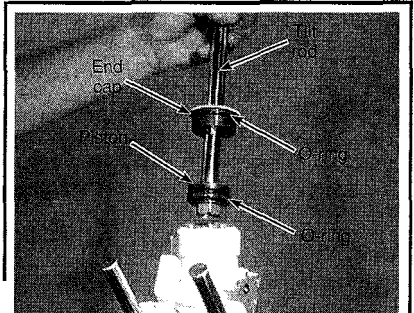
Lower the tilt rod into the tilt cylinder bore
